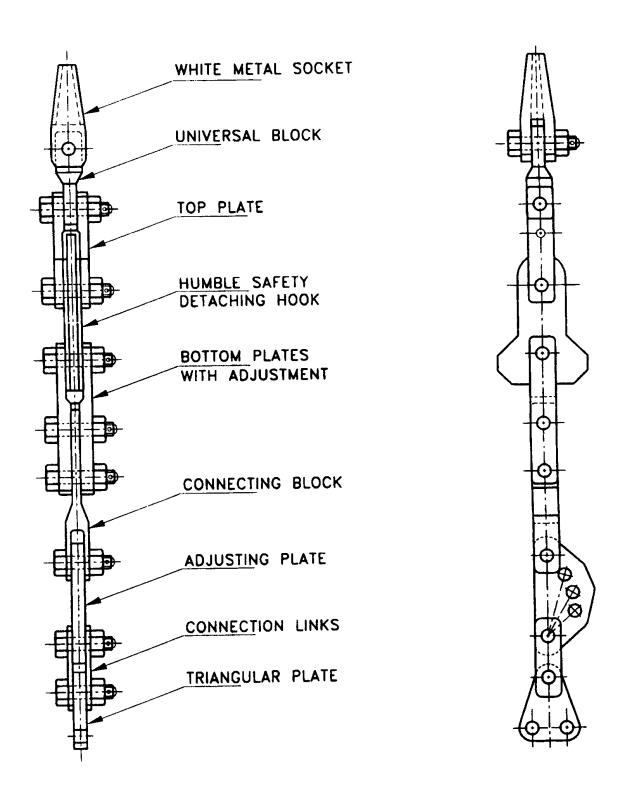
Typical Arrangement of Cage Suspension with Links and Adjusting Plate
